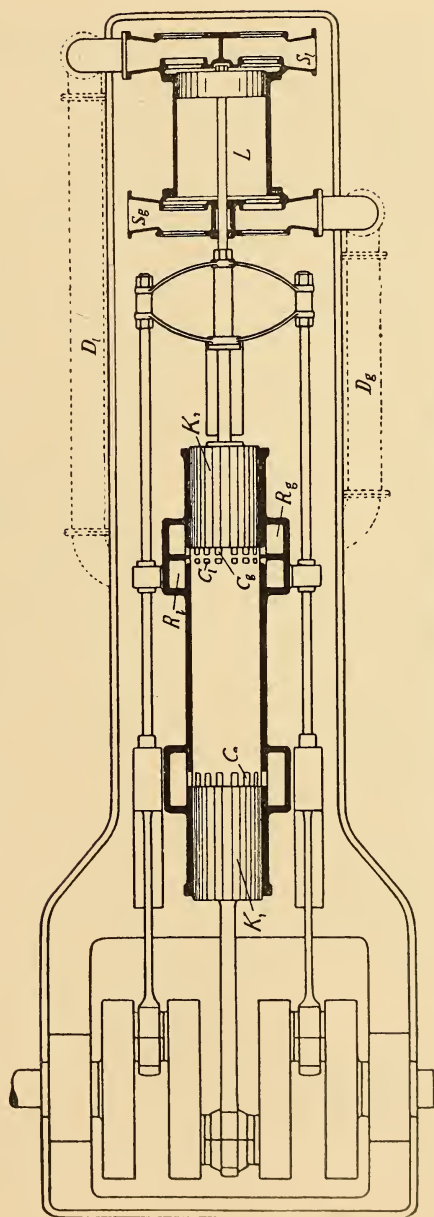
Arrangement of Oechelhäuser Gas Engine.
